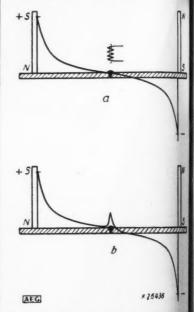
(a) Chart record of a perfectly will joint. (b) Chart record showing defect a welded seam.
